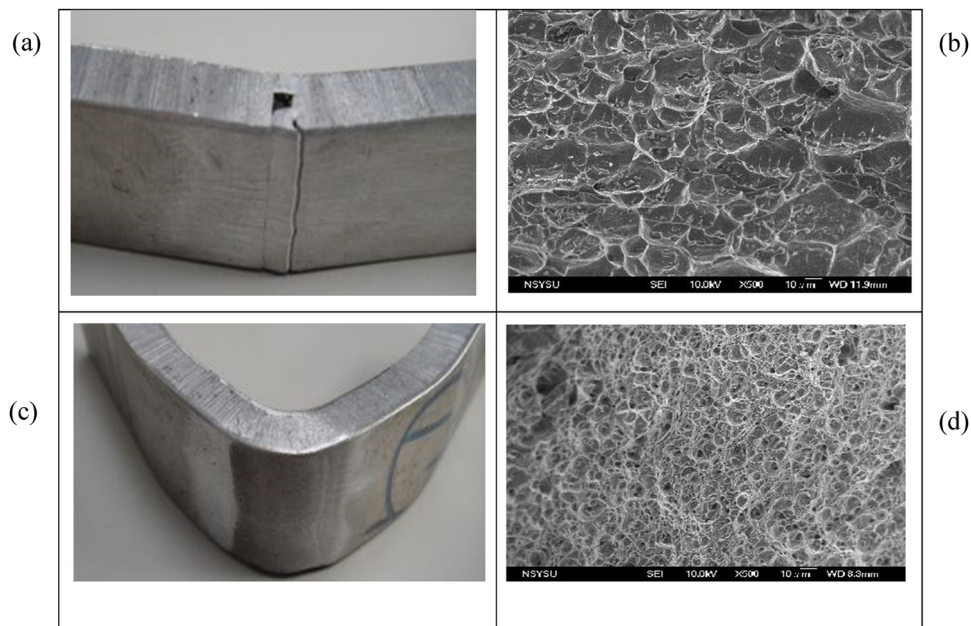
Macrograph of the bending tested specimen with (a and c) macrophotographs of the bending test and (b and d) microstructures for the traverse-weld specimen.
